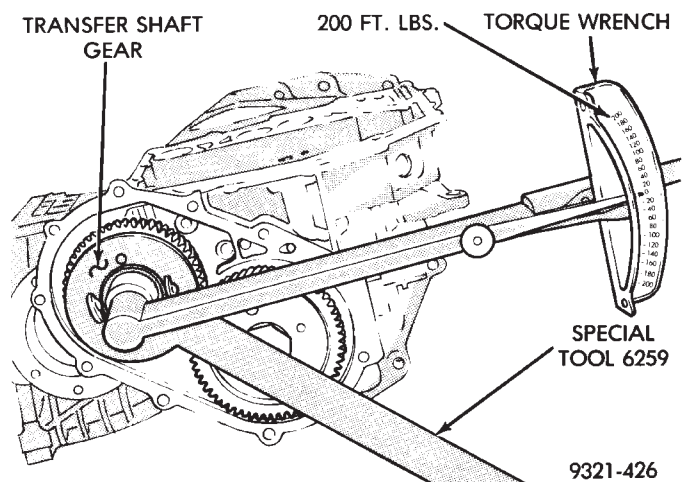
Transfer Shaft Gear Nut and Washer
